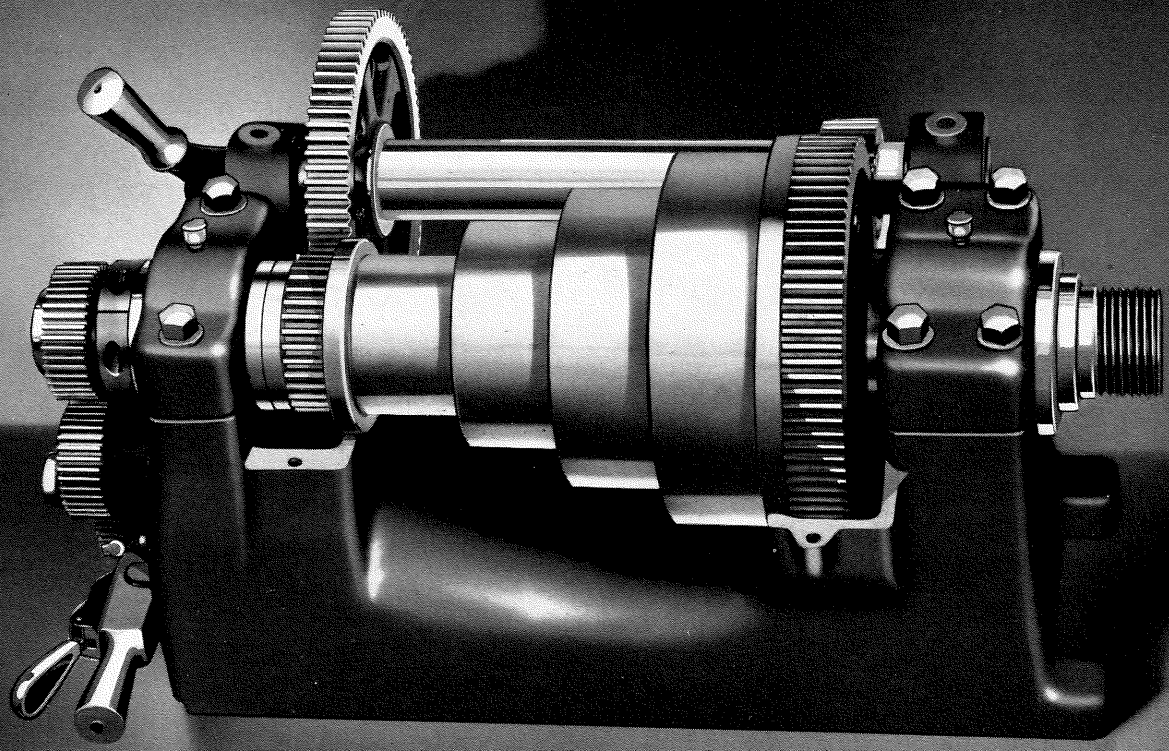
The Lathe Headstock with Gear Guards Removed to Show Back Gears
